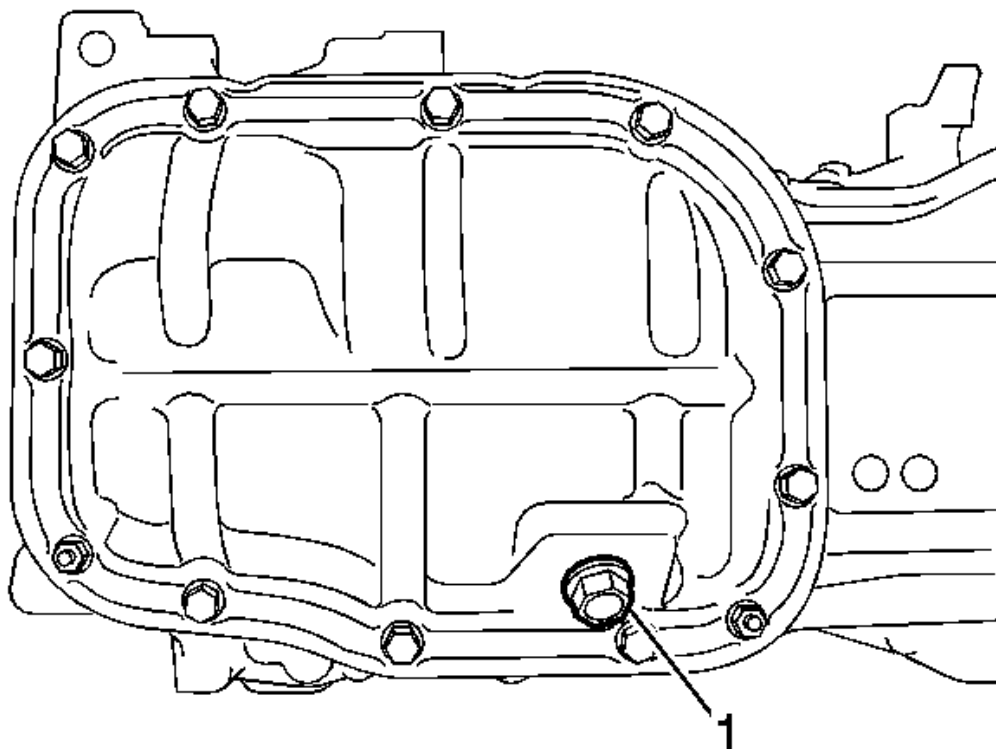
Identifying Oil Pan Drain Plug & Gasket
